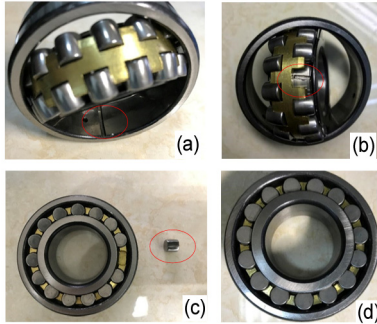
The object diagram of the roller bearing: (a) outer ring fault; (b) inner ring fault; (c) rolling element fault; (d) normal.
